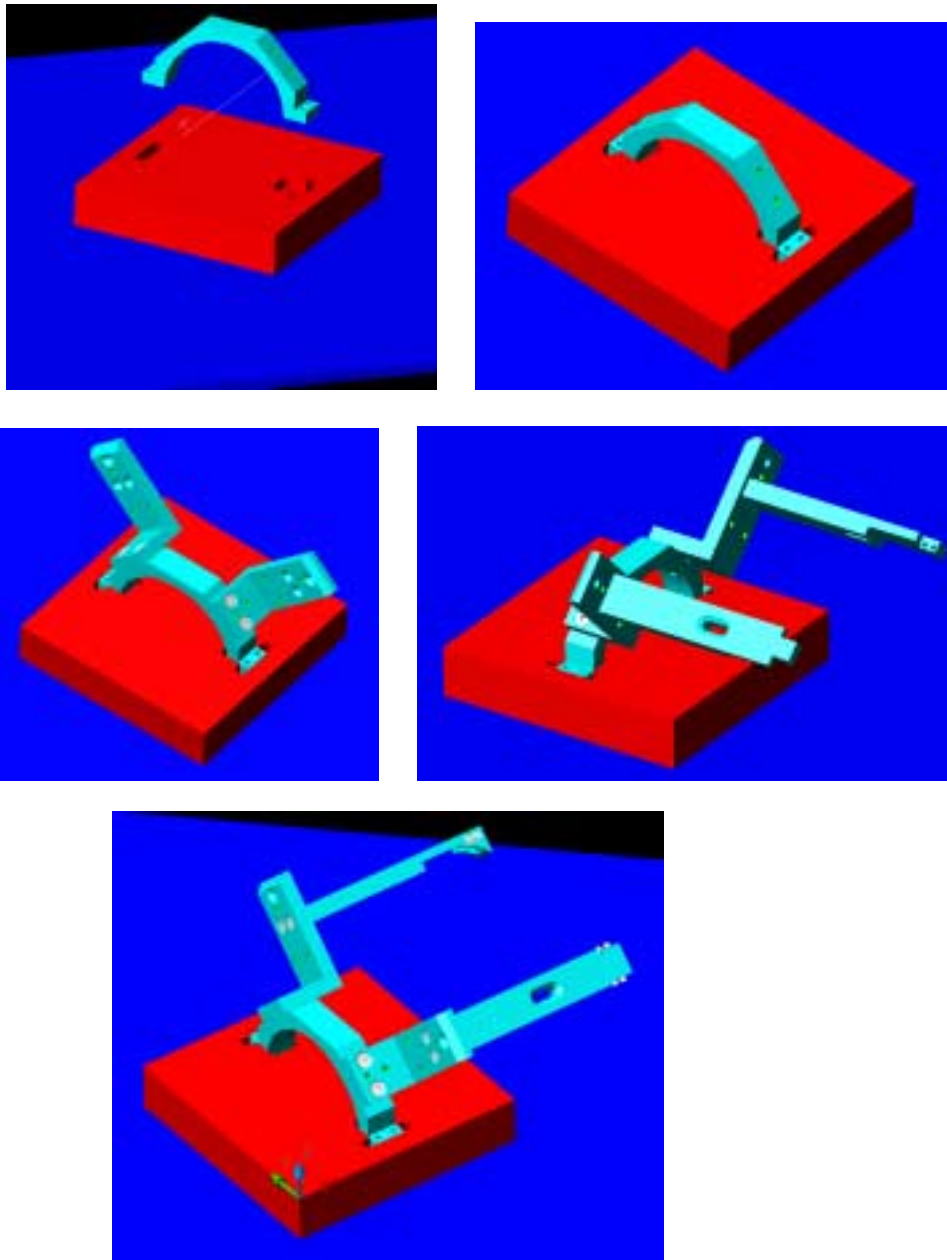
Fig.-46: Sketch showing the process to be followed in sub-assembly B.
